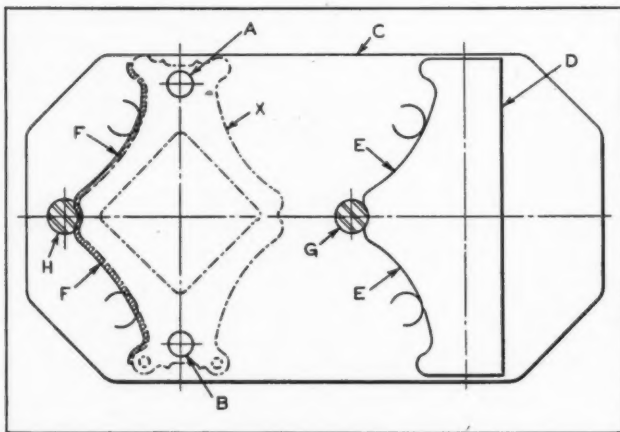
Fixture Used for Profile-milling Pawl Levers
